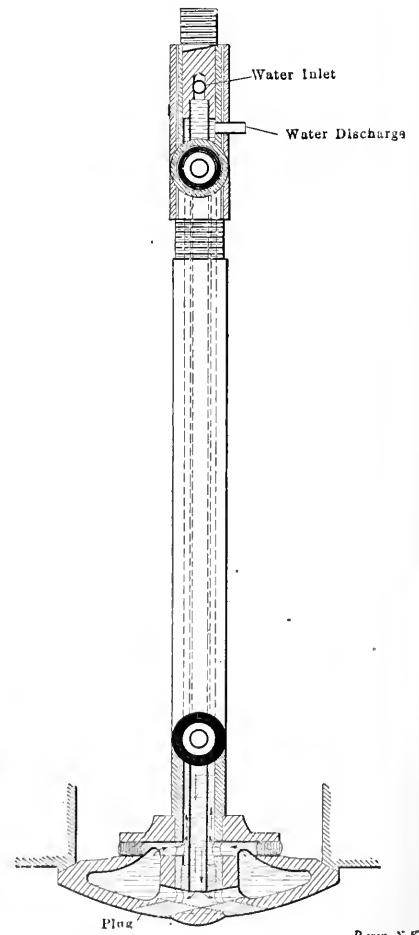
SECTION OF WATER-COOLED EXHAUST VALVE
